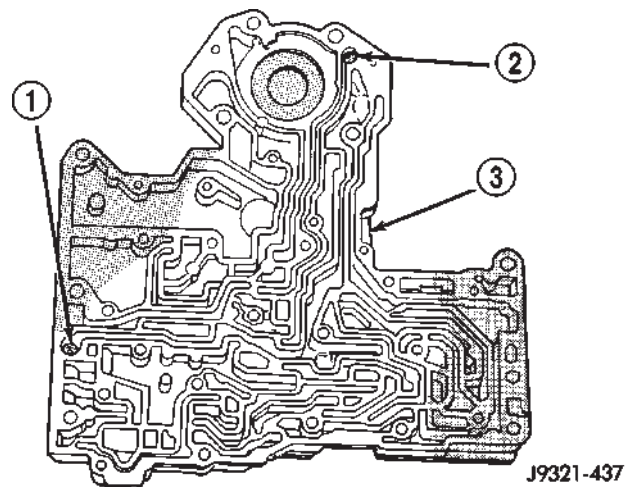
Rear Clutch and Rear Servo Check Ball Locations
